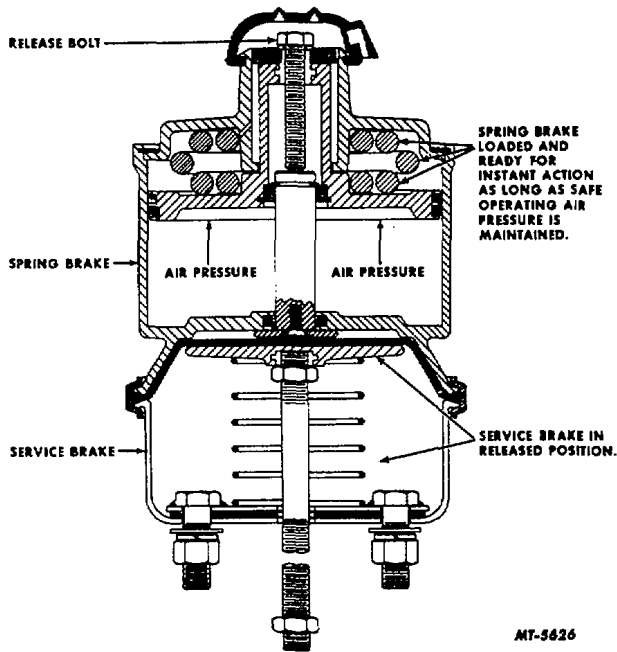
Parking Brake and Service Brake in Released Position (Air Pressure Applied to Parking Brake Spring).
